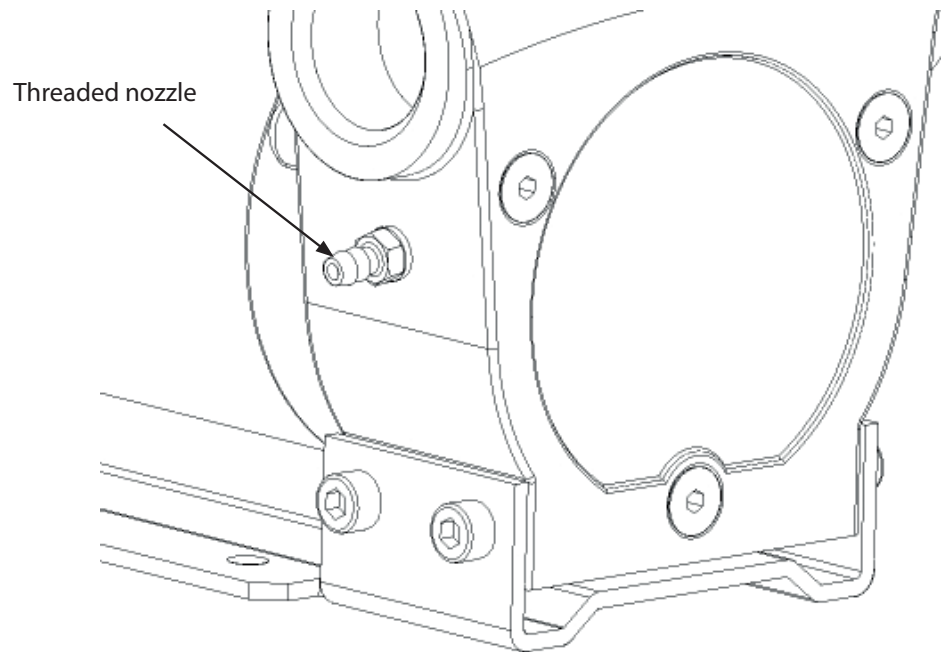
Threaded nozzle for siphon protection screwed in place
